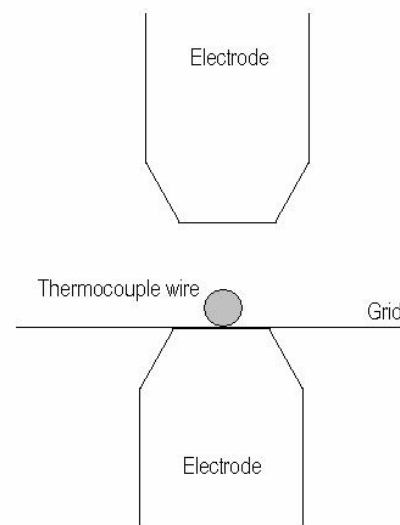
Close up of electrodes, with grid and thermocouple wire in place.
